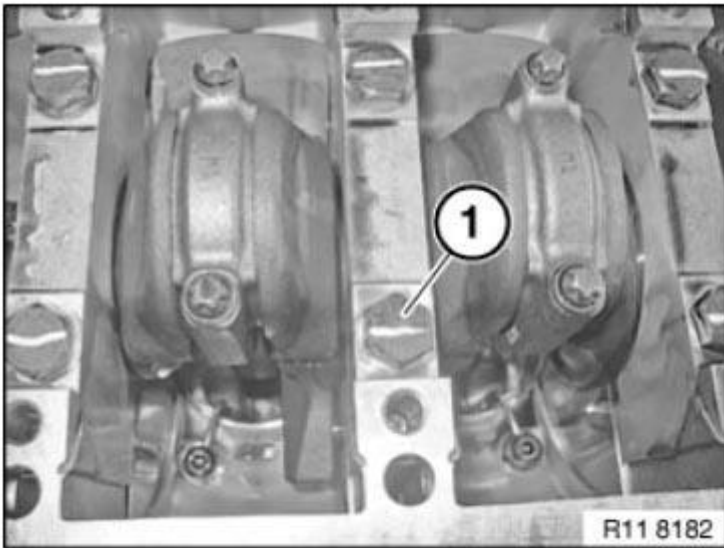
Identifying M10 Crankcase Bolts With Colored Marking
